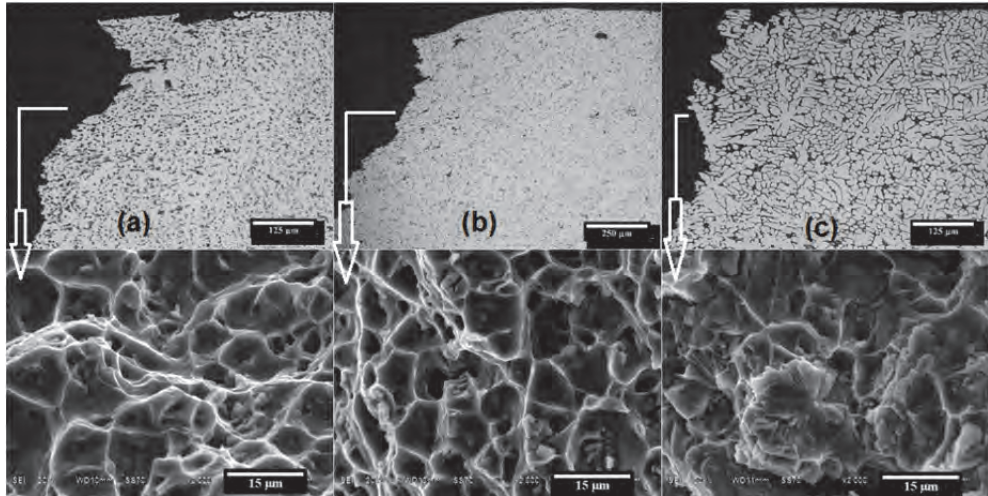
Tensile fracture surfaces of fully dressed welds displaying predominantly ductile mixed-mode failure in the weld metal (a) 5083/ER5356, and (b) 5083/ER5183; and brittle failure in (c) 5083/ER4043 weld metal.
